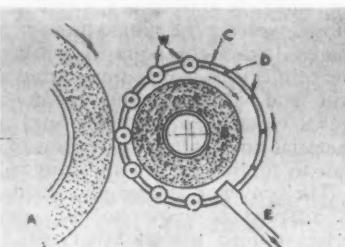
Illustrating the principle employed for grinding diameter of small wheels for counting machines
